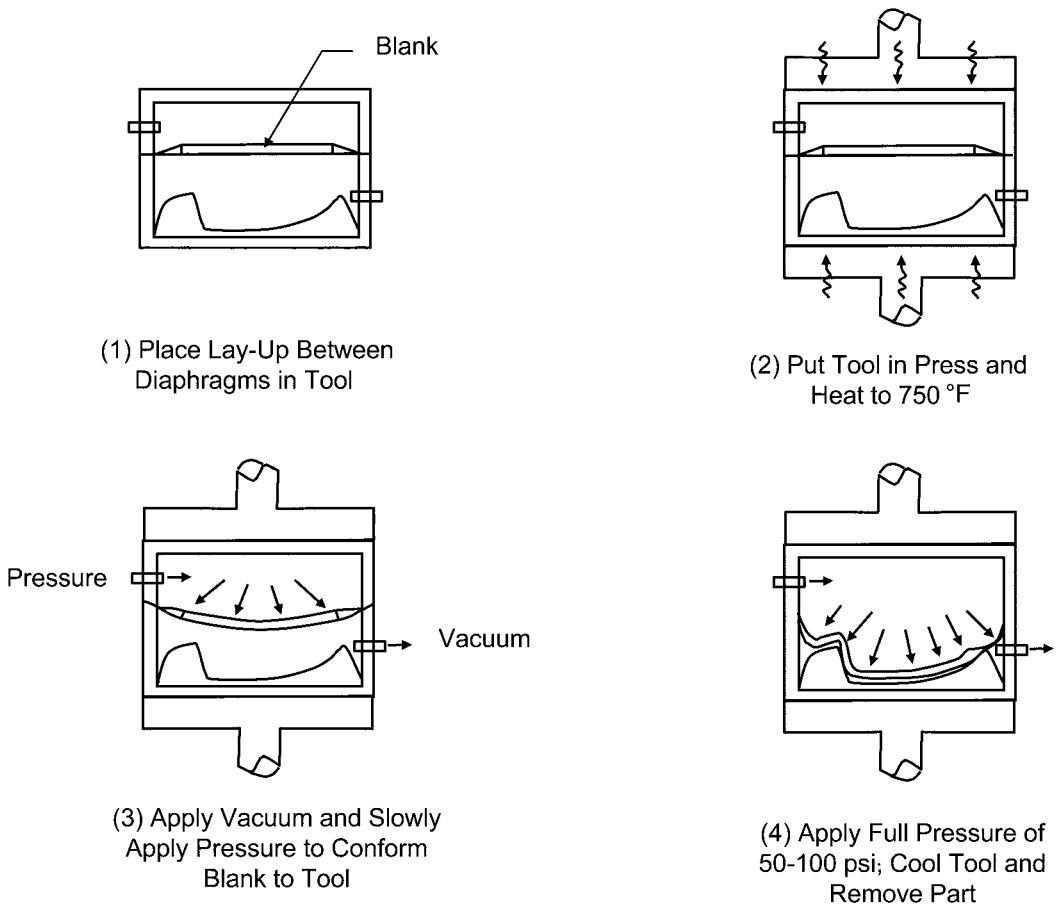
Diaphragm forming method for carbon/PEEK parts
